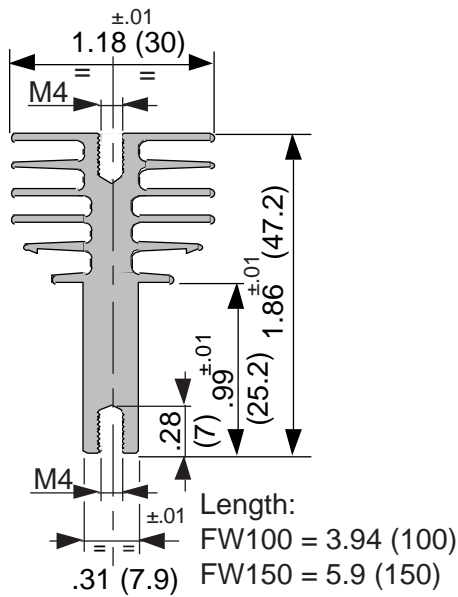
FW100 and FW150 heat sinks; dimensions in inches (mm)
